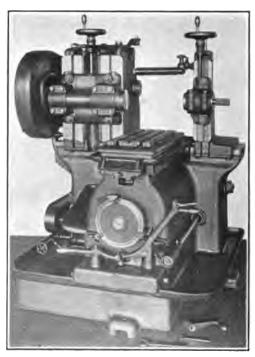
Semi-automatic milling machine with receding table. (Courtesy Pratt & Whitney Co.)
